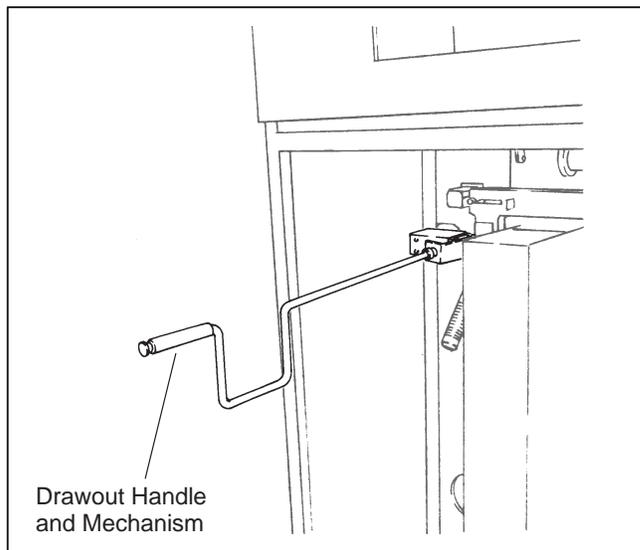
1600-3000 DRAWOUT MECHANISM
